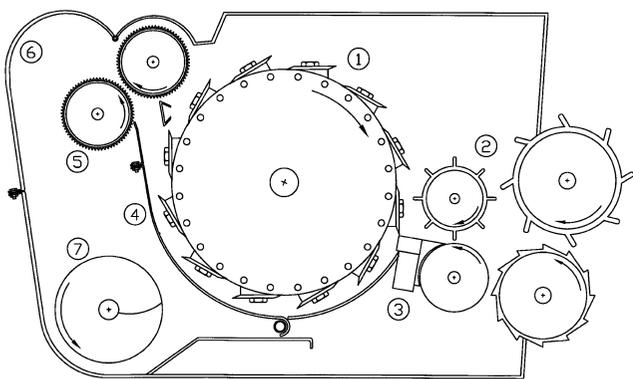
Schematic right-side view of crop processing rolls on the experimental pull-type forage harvester, including ① cutterhead, ② feed rolls, ③ shearbar, ④ removable crop deflector, ⑤ crop processing rolls, ⑥ crop deflector and access panel, and ⑦ cross-auger.
